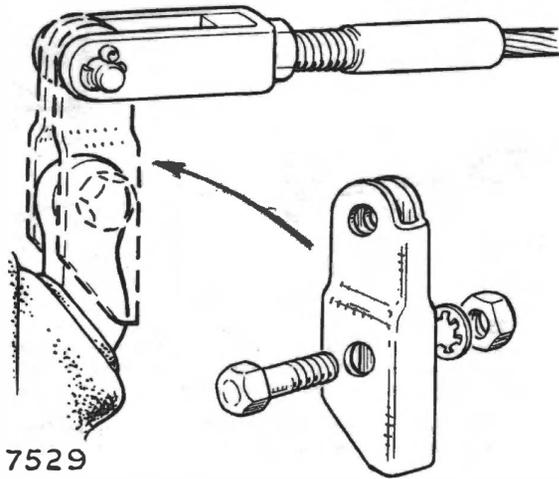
The lever extension fitted between the wheel cylinder lever and the handbrake cable forkend; note the position of the "fold" in the lever extension relative to the wheel cylinder lever.
